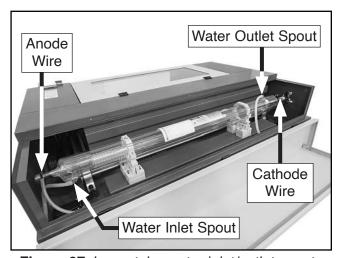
Laser tube water inlet/outlet spouts (G0873 shown).
